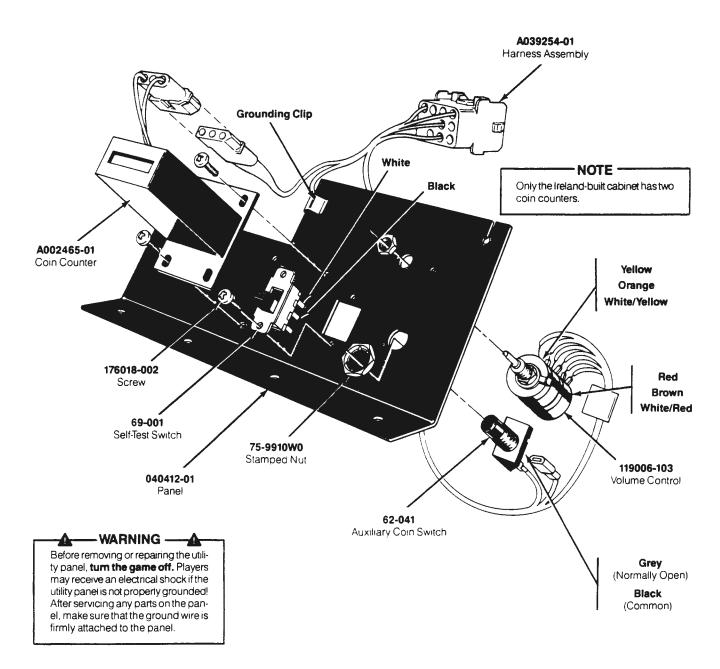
Utility Panel Assembly A040413-01 B Parts List
